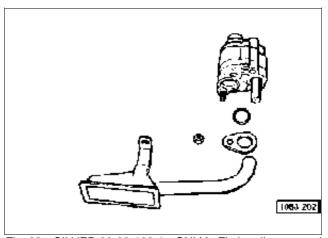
SILVER 80-90-100.4* - ONLY - Fit the oil pump and after securing to engine block check gears for free sliding. Install the oil pipe rose;
